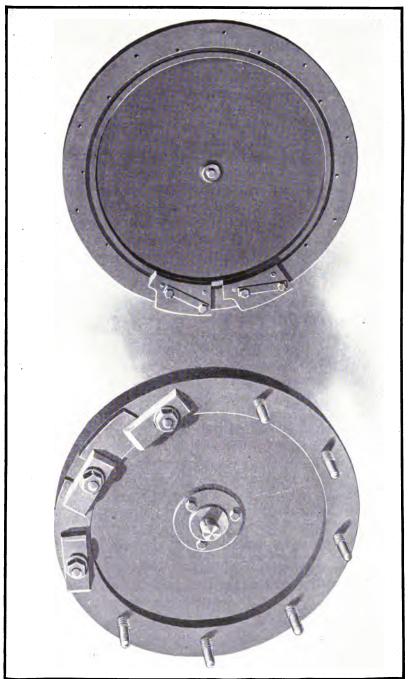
FACE PLATES FOR TURNING AND GRINDING THE INNER EDGES OF THE INDEX BLOCKS
